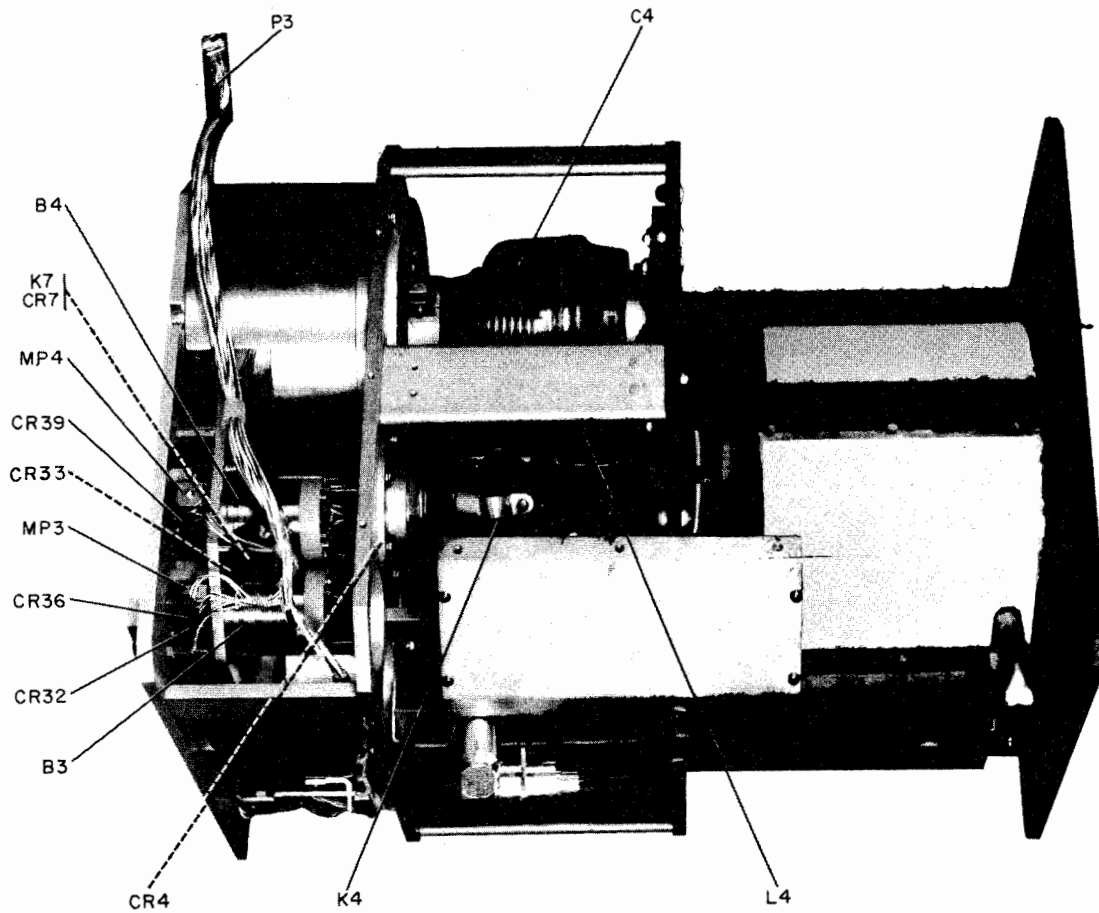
Loading-Phasing Circuit Assembly, Right Side, Parts Location
